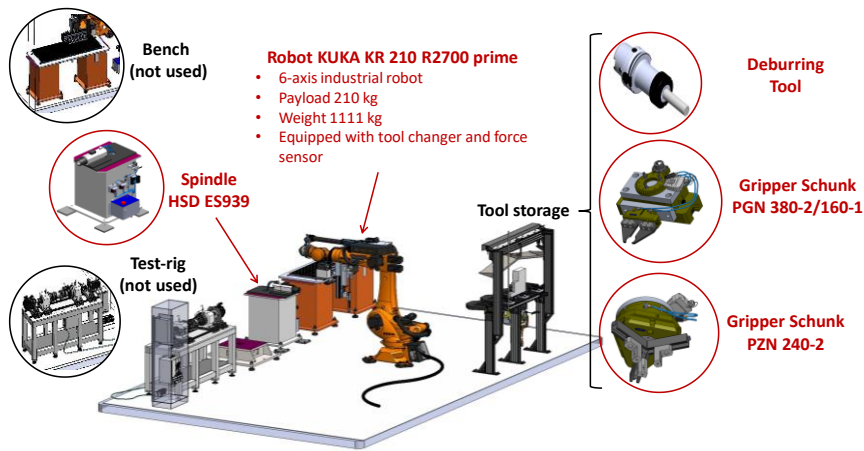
Main components of the robotic cell: KUKA robot, spindle, grippers, and tools for flexible manufacturing cycles.
